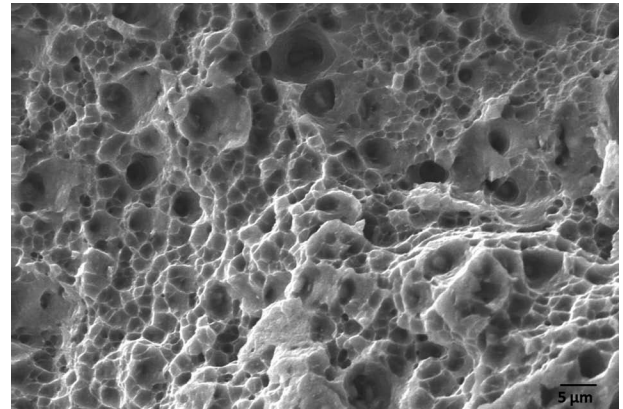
Fracture surface of a room temperature tensile-tested V65 (equivalent to AA 2014) wire rod rolled at 250°C. Note fine equiaxed dimples
